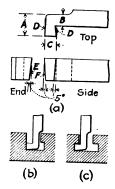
Tee slotting tools. Two tools (right hand and left hand) are needed. In the figure (a) shows three views of right hand tool, top face is flat (no rake), cutting edge C is given clearance of about 5° on front E, sides F, and also from the front as shown at D. As will be observed in b and c, which show respectively the start and finish of the cut, the width of the tool A cannot be greater than the original slot (see B) and the width of the neck b must be narrow enough to permit the tool to cut its share of the T-slot.
